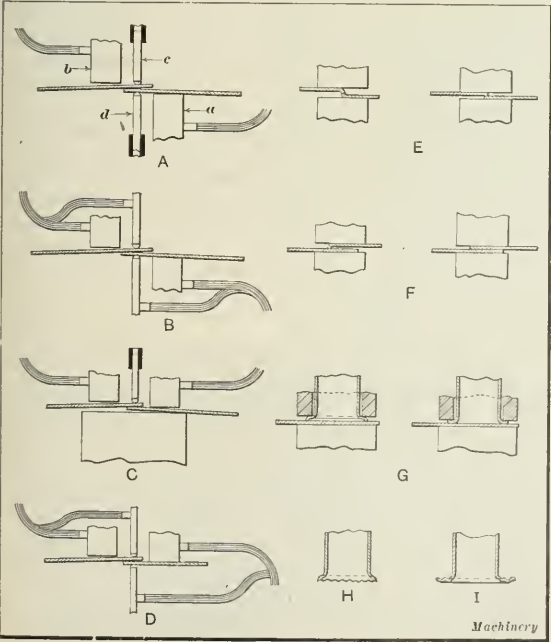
Diagram illustrating Various Methods of accomplishing Lap-welding Operations on Spot-welding Machine
